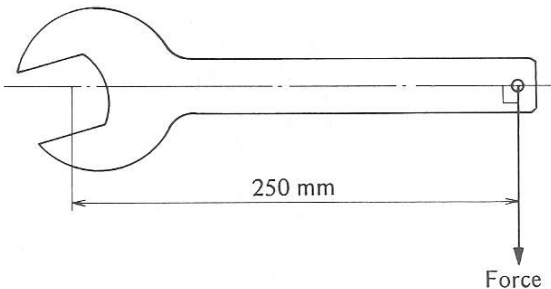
Method of applying specified torque setting using a specially adapted open-ended spanner (Sec 13)
